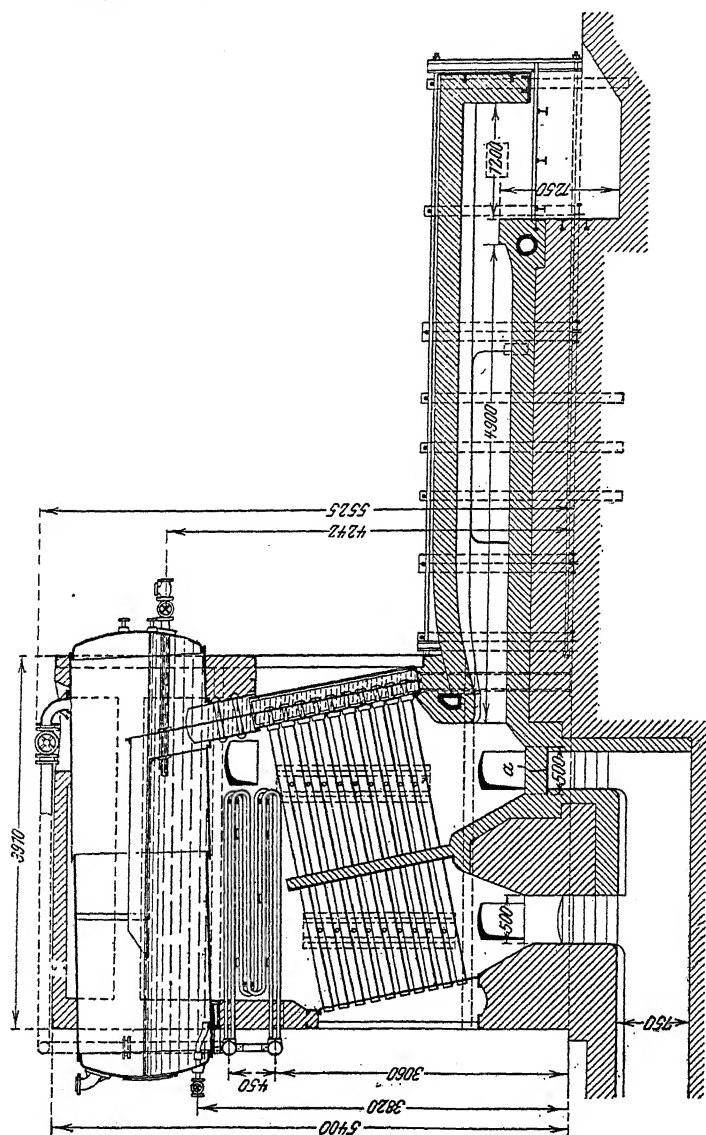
JOINT-CONSTRUCTION OF FURNACE WITH WASTE-HEAT BOILER. DÜRR TYPE.
